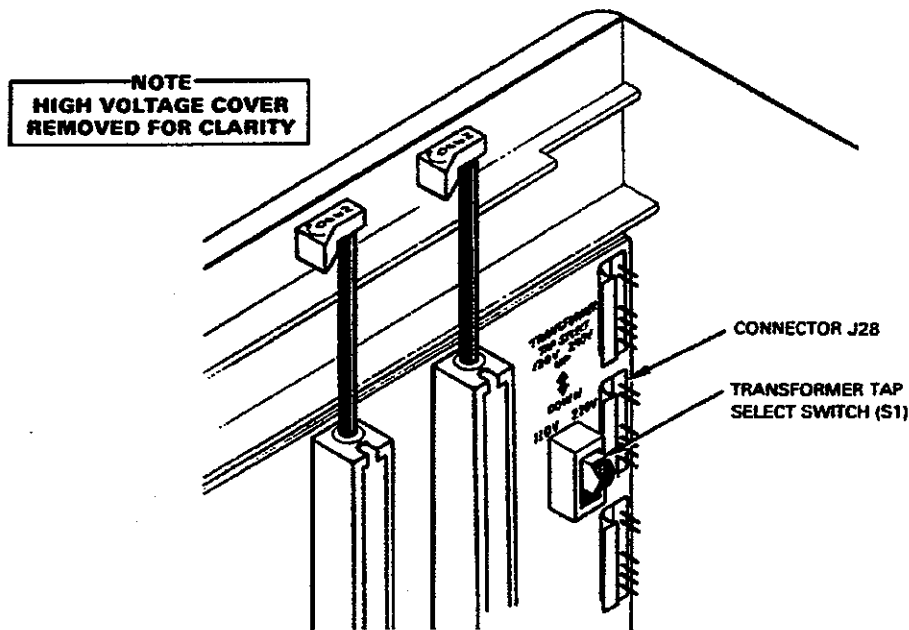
Transformer Tap Switch (S1) on Mother PC Board
